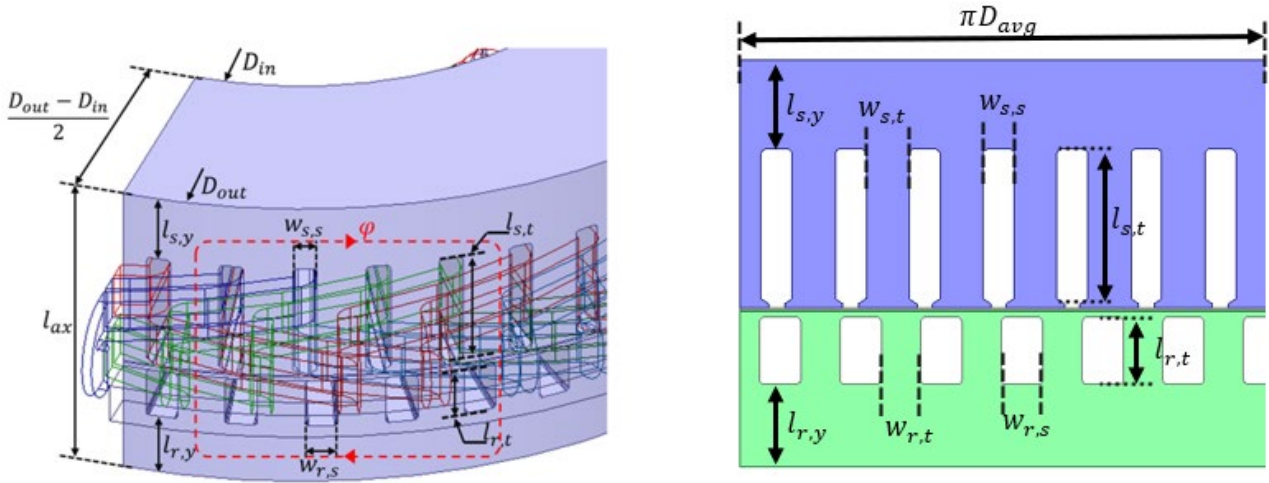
Geometrical representation of the AFIM core layout. Left: 3-D drawing of stator and rotor slot arrangement with key design parameters. Right: 2-D linear equivalent model, highlighting the tooth and slot dimensions for both the stator and rotor.
